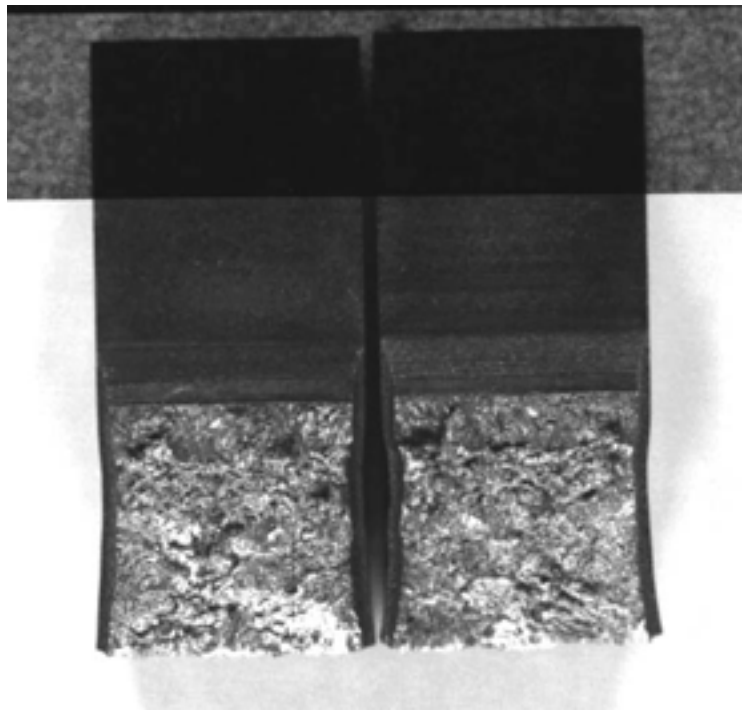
Fracture surface of specimen 75-03T tested at 288°C
